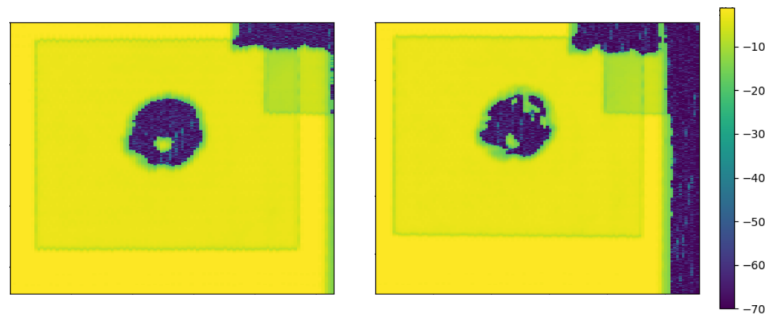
C-scan of specimen AMP-300N-10sec. Left: before welding. Right: after welding.
